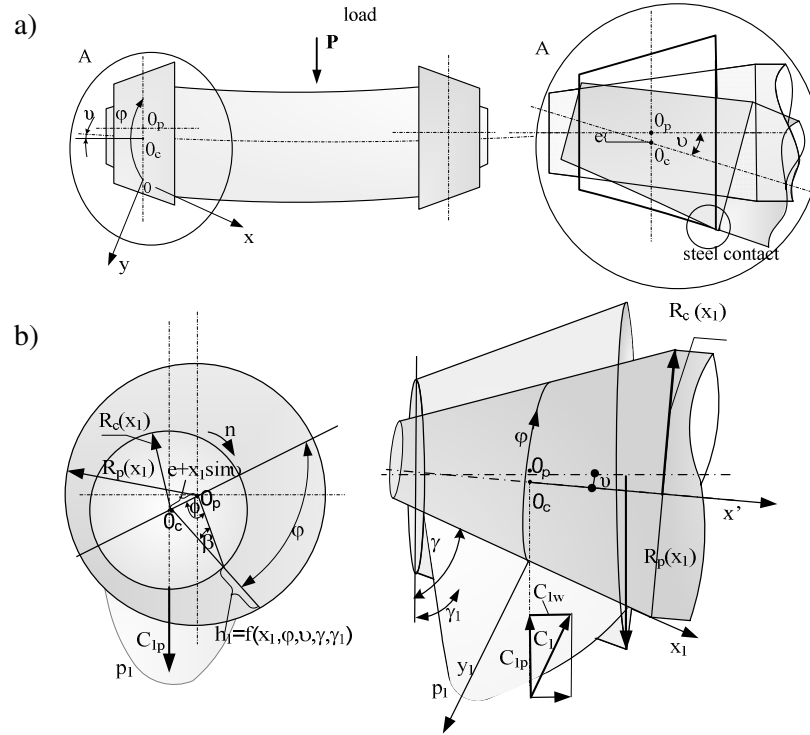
The geometrical model of conical slide bearing, a) bush and journal bearing misaligning in conical slide bearing, b) general geometry of conical bearing, φ , y_1 , x_1 – dimensionless conical coordinates, λ – eccentricity, γ and γ_1 – conical angles, v – tilt angle, O_p , O_c – bush and journal middles, C_{1w} , C_{1p} – dimensionless components of bearing capacity, C_1 – dimensionless bearing capacity, $R_c(x_1)$ and $R_p(x_1)$ – bush and journal radiuses
